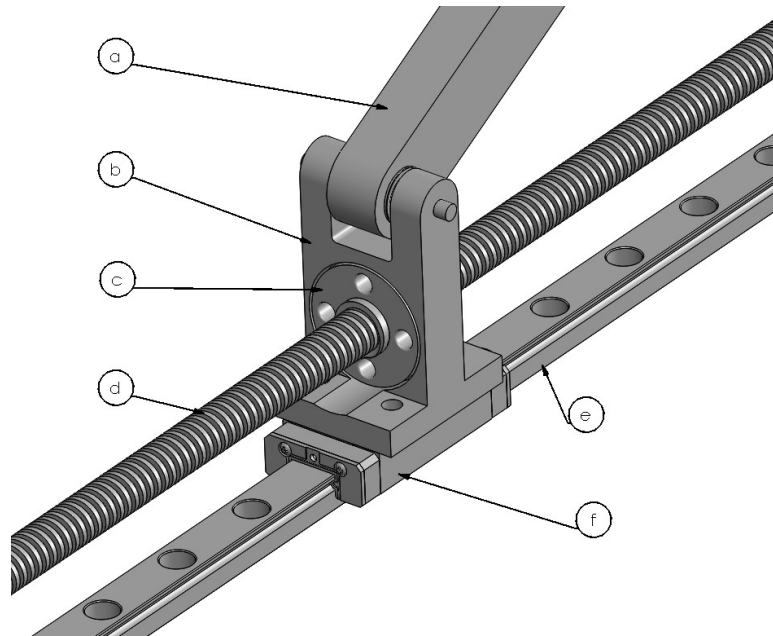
(a) Coupling link (b) connection part between the nut and carriage (c) nut (d) lead screw (e) rail (f) carriage
